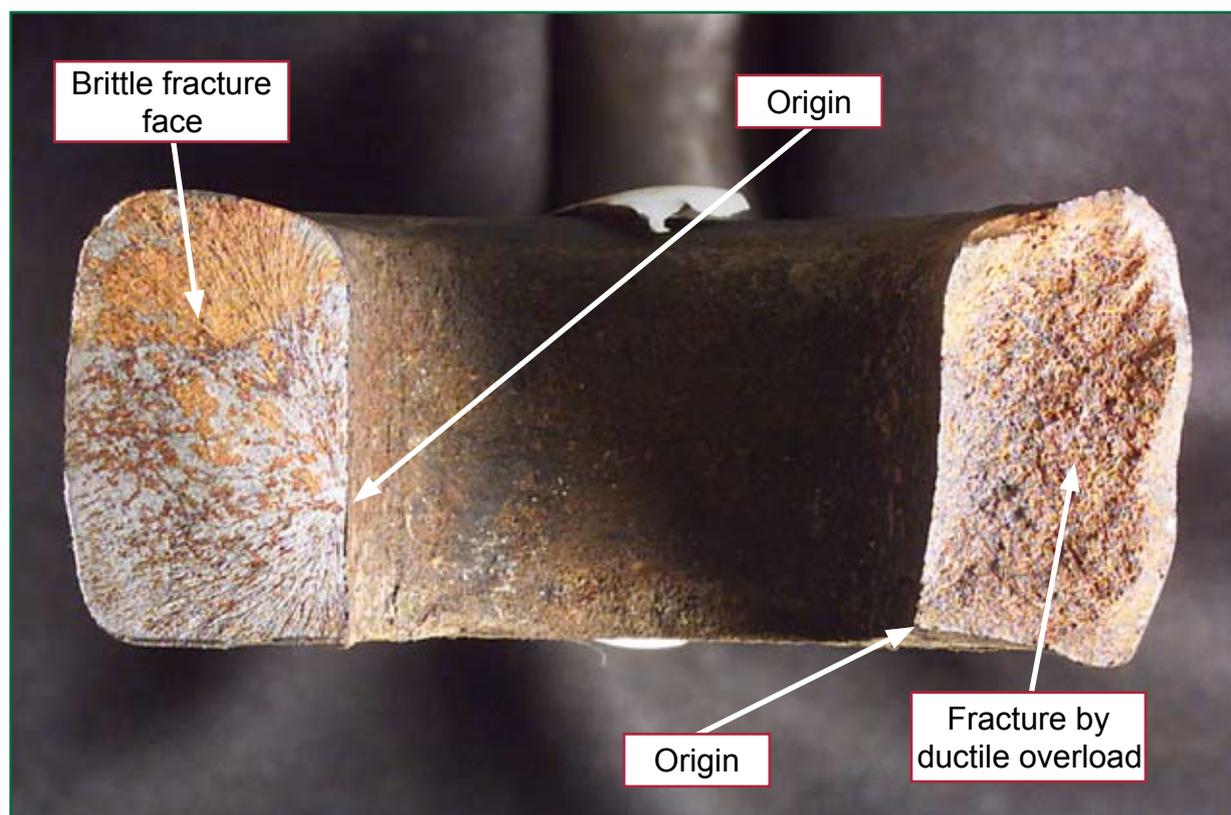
Eye end fracture faces (by courtesy of Serco Technical and Assurance Services)
